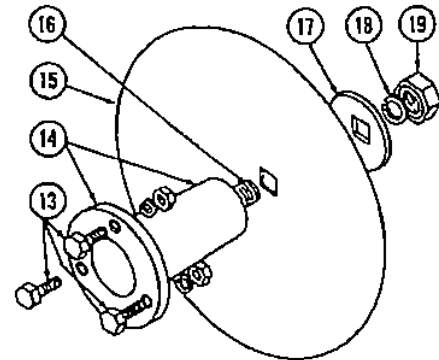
FURROW FILLER ATTACHMENT — MACH. NO. 200080
